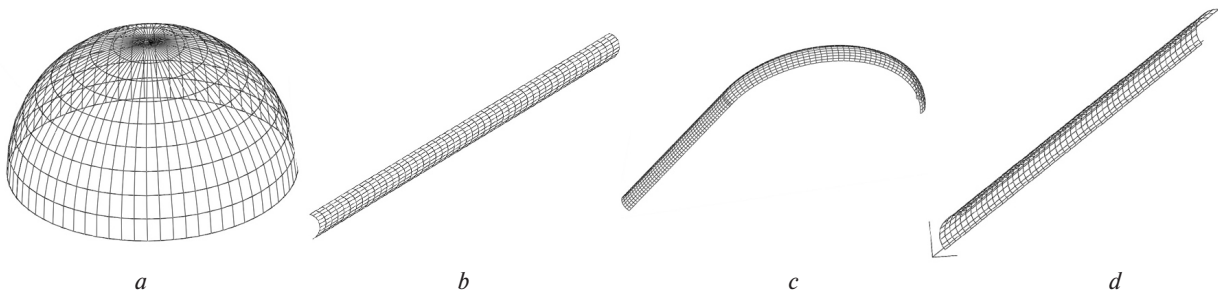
Examples of theoretical tool surfaces of various cutting tools: a – grain; b – the passing cutter; c – a round cutter; d – bevel mill
